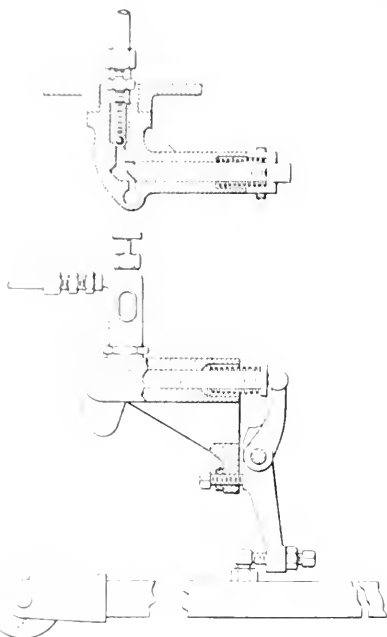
SPECIAL OIL PUMP FOR LUBRICATING THE CYLINDER OF THE EVIRUILE OIL ENGINE
